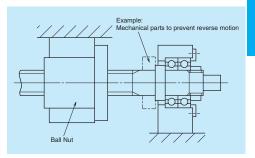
Nut and ball screw are required to be separated when installing in this structure.
